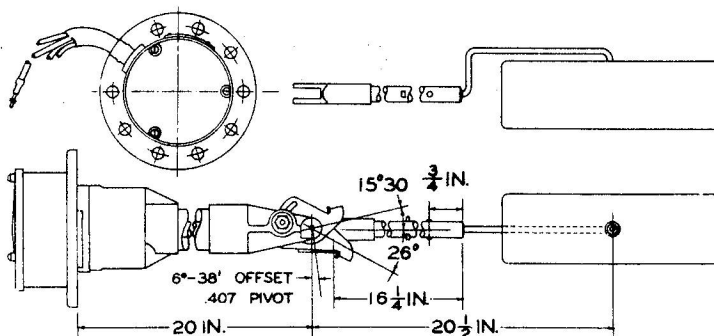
(Sheet 8 of 9 Sheets). General Dimensions
